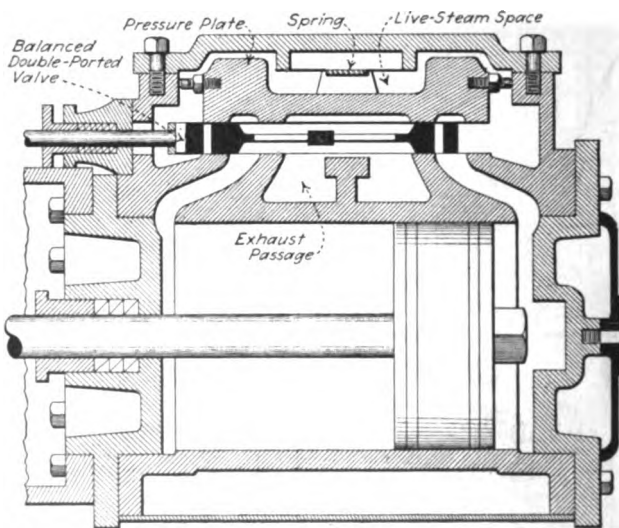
Longitudinal section of Sweet valve (Eric Ball Engine Co). This is the same valve as is shown in Fig. 125.
